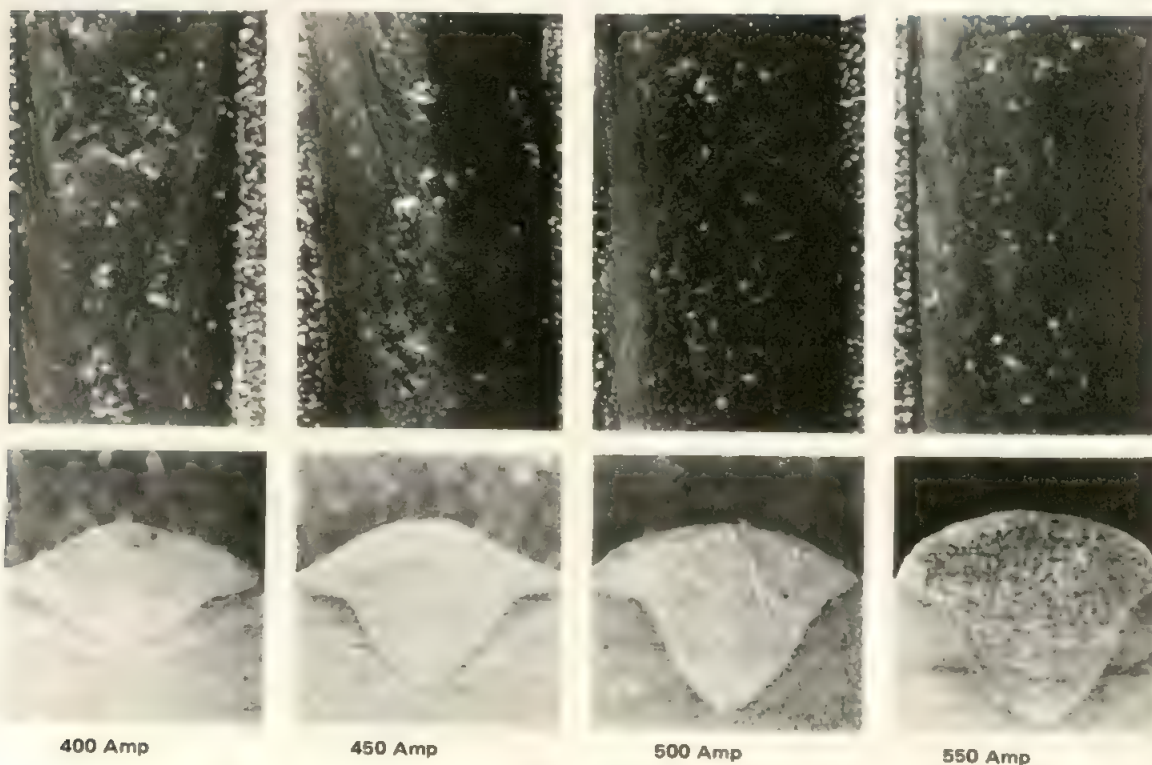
Weld penetration related to primary variable.
